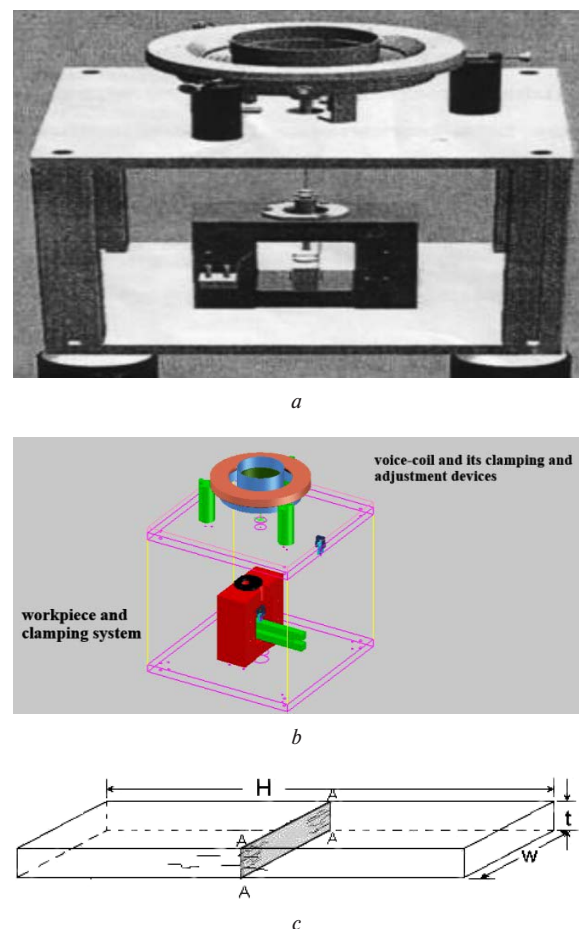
Test machines and workpiece fixing mechanisms (a). A drawing of the assembly of test machine place gathering accommodate (b), drawing of the assembly of test machine main parts. (c) drawing of workpiece fixing position on test machine [1]
